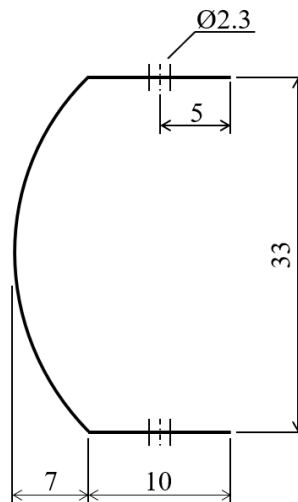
A cross-section sketch of the flexible U-shaped panel. Not drawn-to-scale and all dimensions are in millimetres.
